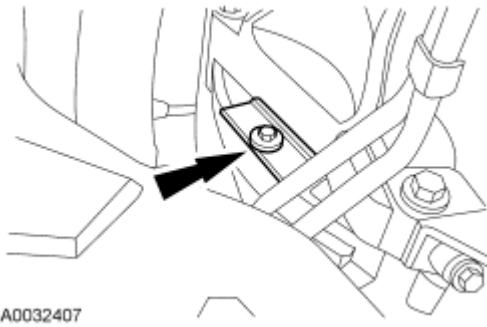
Locating Electrical Connector & Wiring Harness Retainer To Crossmember
